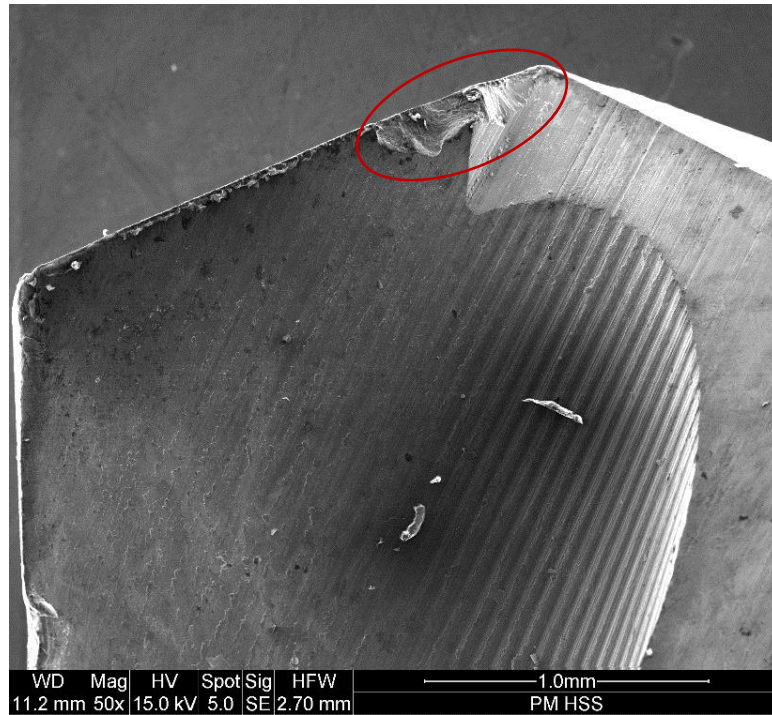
50x SEM flute view of cutting edge HSS drill bit after drilling 60 holes in PM titanium.
